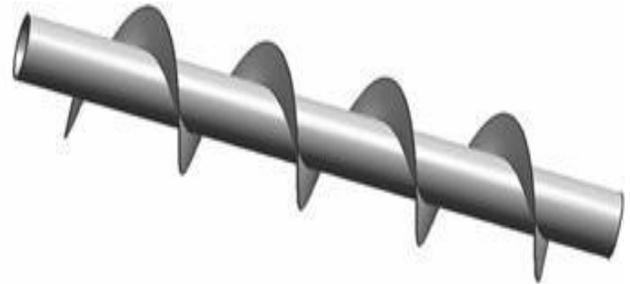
Inner Tube with Helical Fins on Outer Surface [14]
